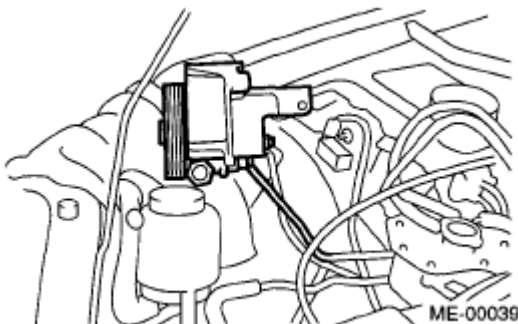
Identifying Power Steering Pump On Right Side Wheel Apron
